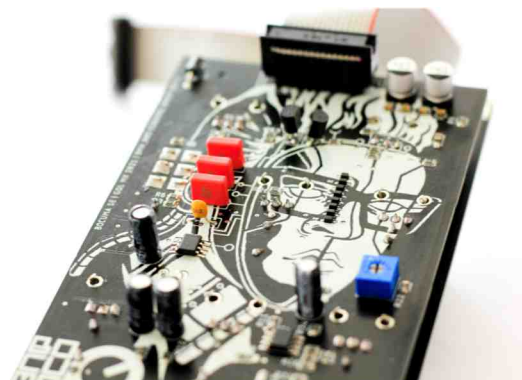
Esquivel illustration printed on circuit board. Esquivel module back panel. Bocuma. www.bocuma.mx/product/esquivel
